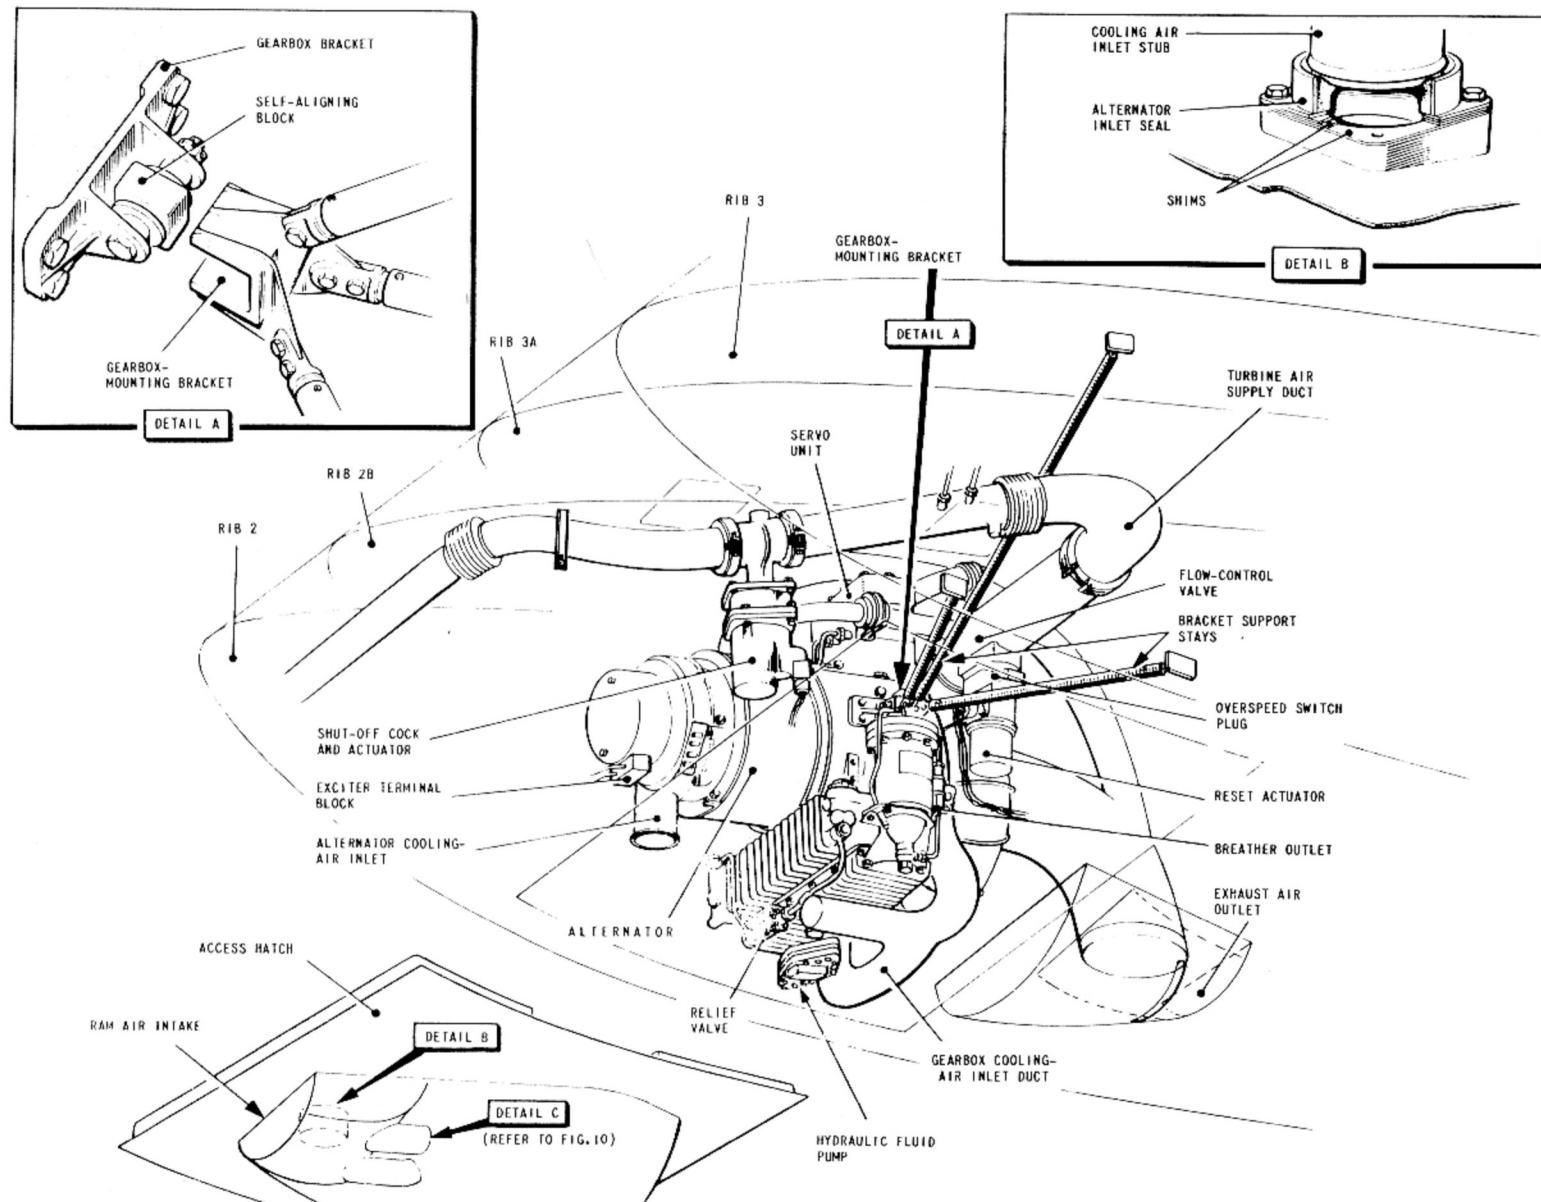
TURBINE - GEARED ALTERNATOR - REMOVAL AND ASSEMBLY (1)
